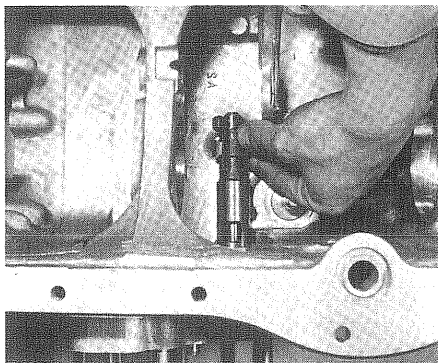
Rod-change type selector fork assembly (Sec 9)
